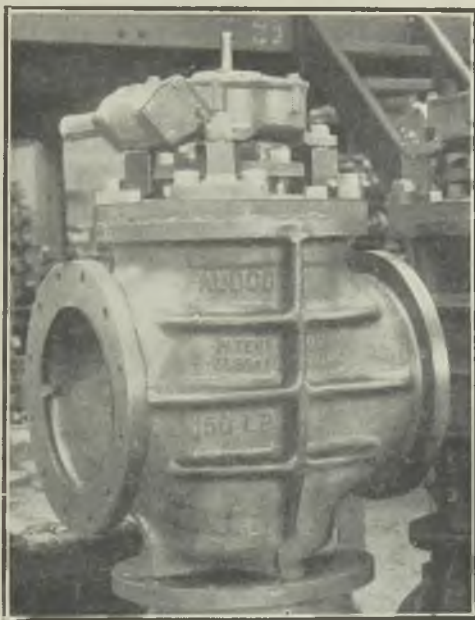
FOURTEEN IN. GUIDE VALVE.
